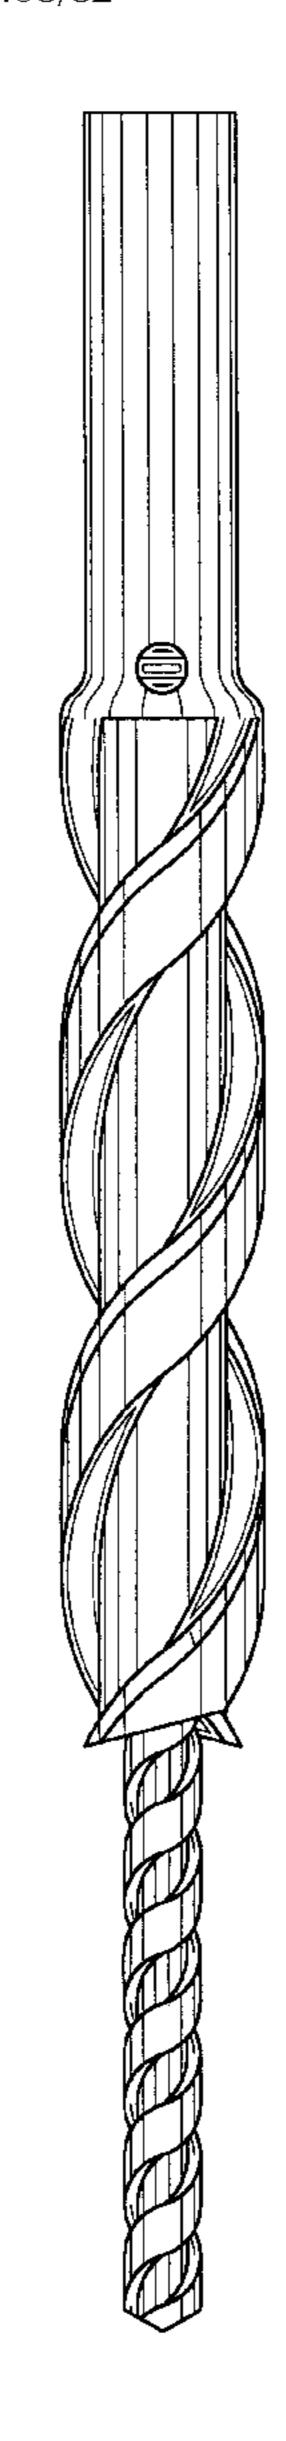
is a left side elevational view of the combined drill and counterbore bits of FIG. 1;
